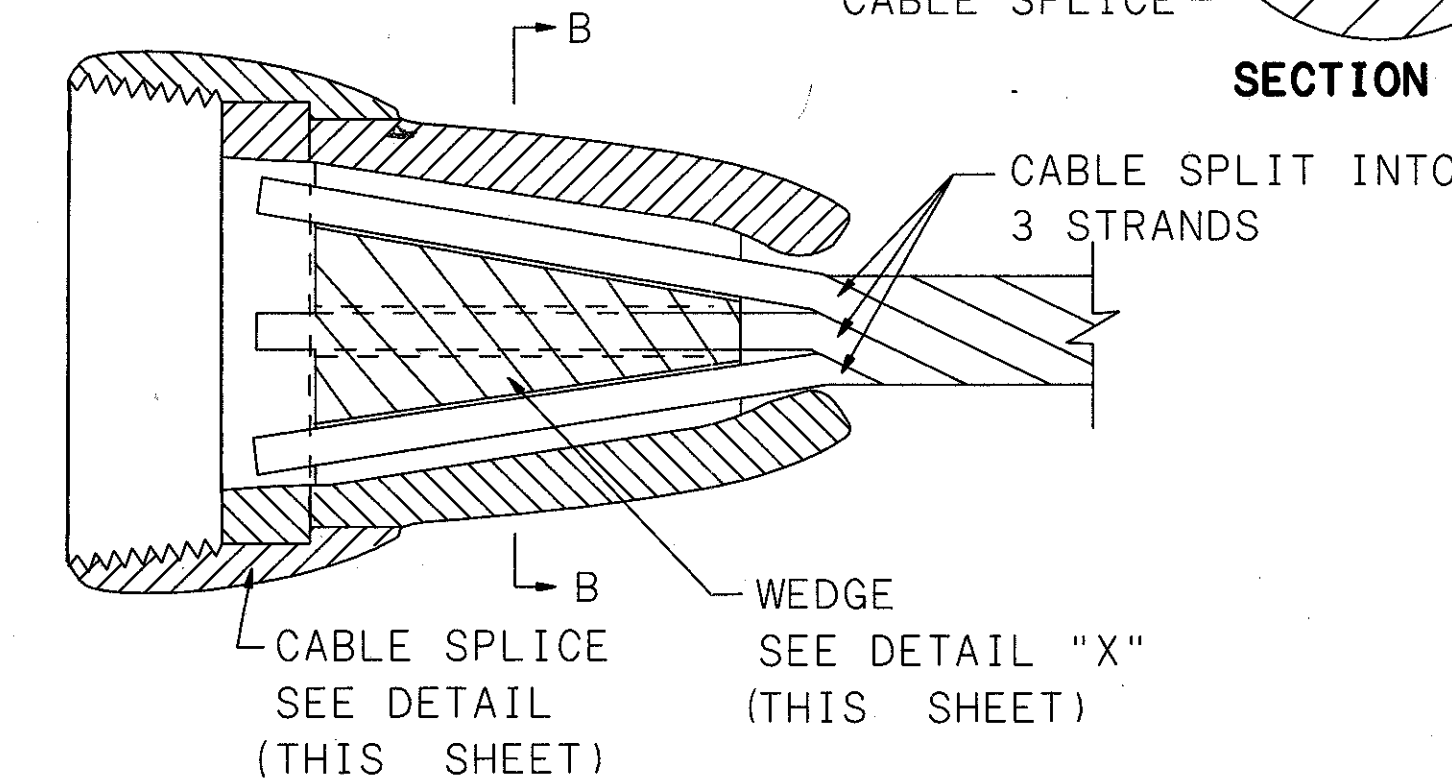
DETAIL "A" STEEL TURNBUCKLE CABLE END ASSEMBLY
